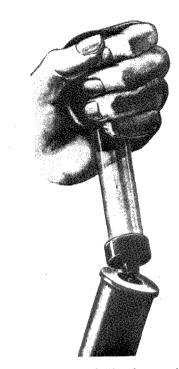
Compressing bulb of wax eliminator and inserting its soft rubber tip in receptacle of crucible former.
